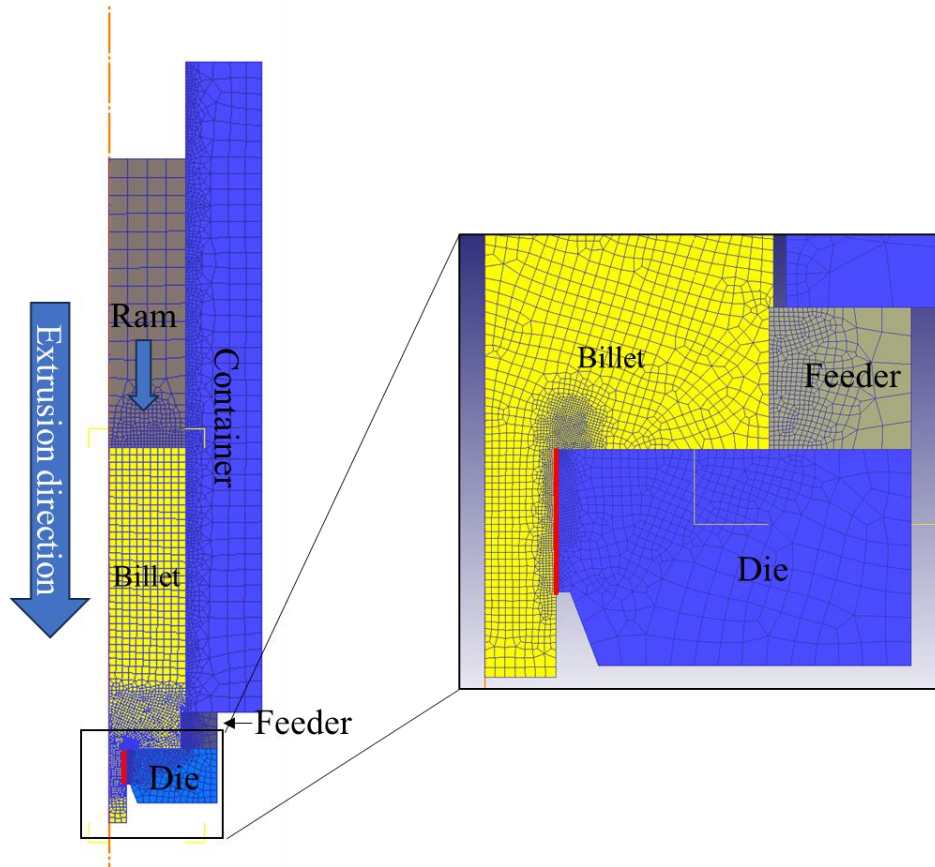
A schematic view of the extrusion process with five parts including ram, die, billet, container, and feeder.
